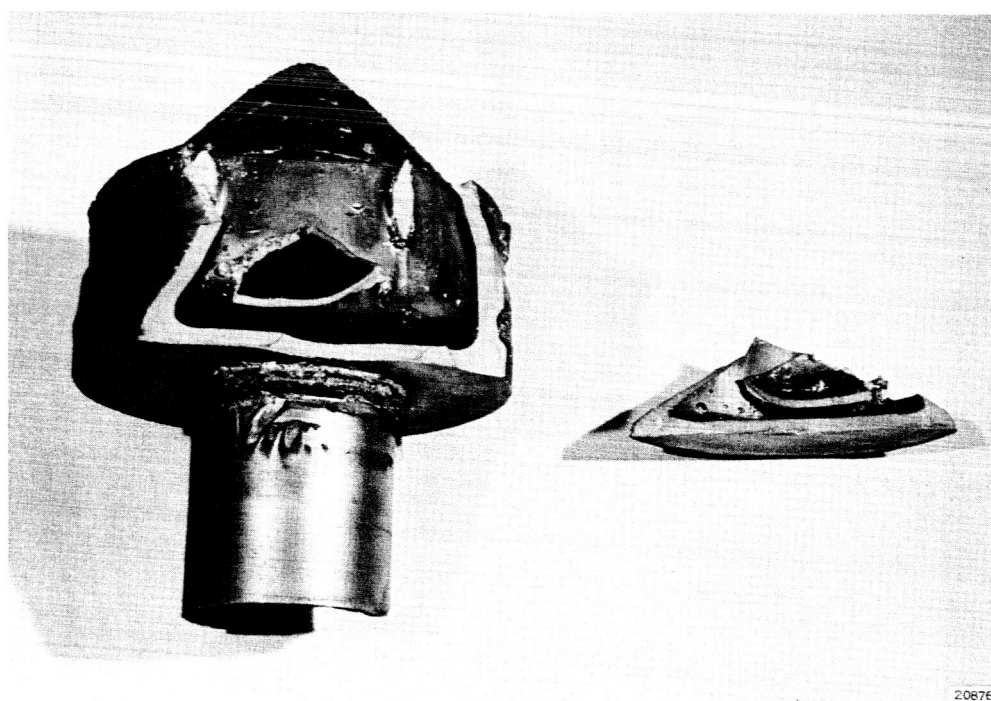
Valve Button Assembly, Vortex Chamber and
